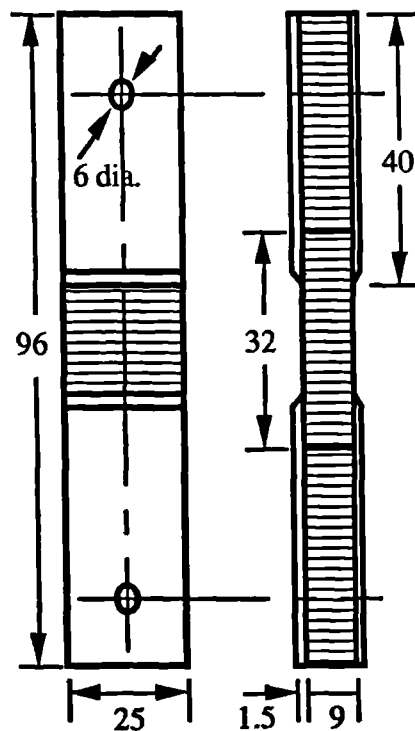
Tabbed pin loaded block specimen (Ishai [1995]), dimensions in mm
